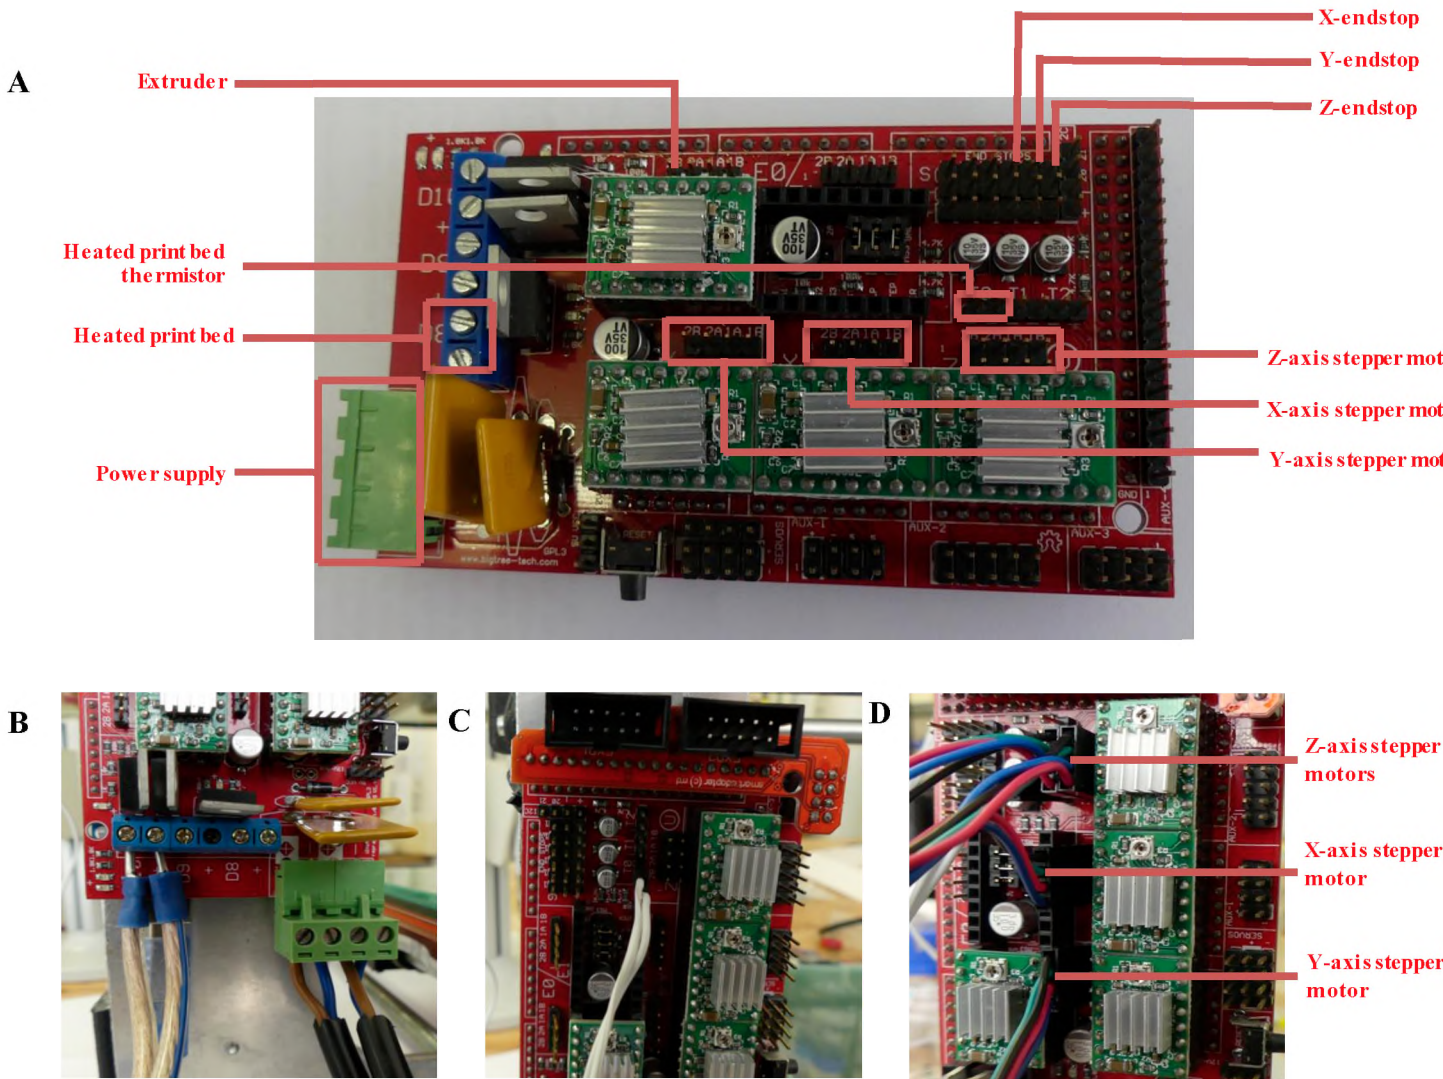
RAMPS 1.4 wiring. A: Schematic of RAMPS 1.4 board wiring. B: Power supply and heated print bed wiring. C: Thermistor wiring. D: Stepper motor wiring
